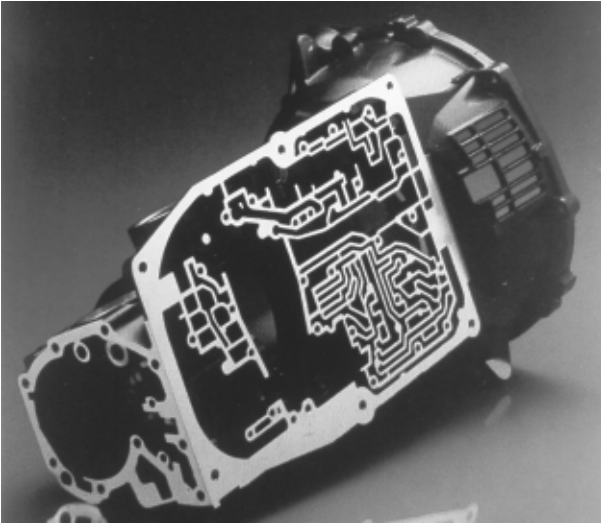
Gearbox casting for a passenger car, in alloy pressure die cast 380.0
